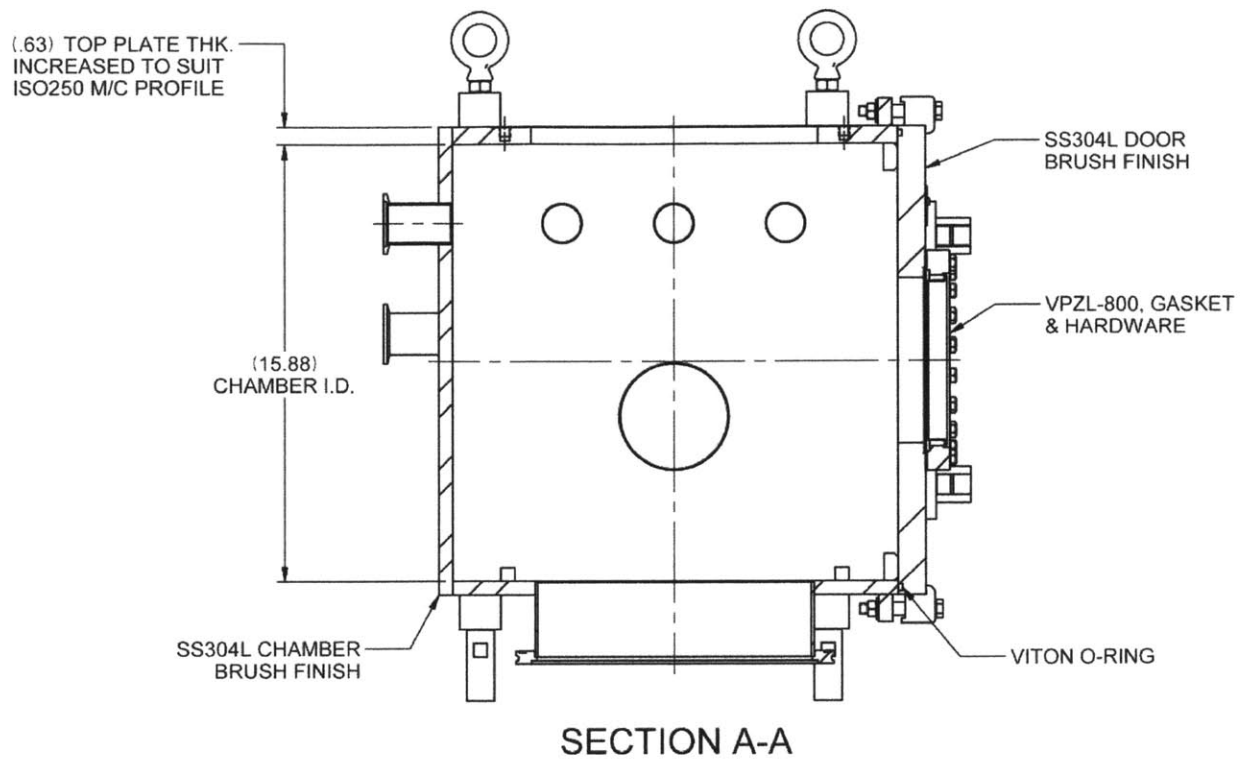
oCVD reactor chamber engineering drawing—cross sectional view from left side.
